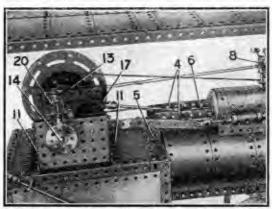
The engine, showing details of the crankshaft, slide bars. crosshead and the governor drive.
